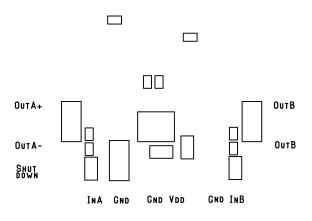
IAP PC board layout: Component-side Silkscreen
